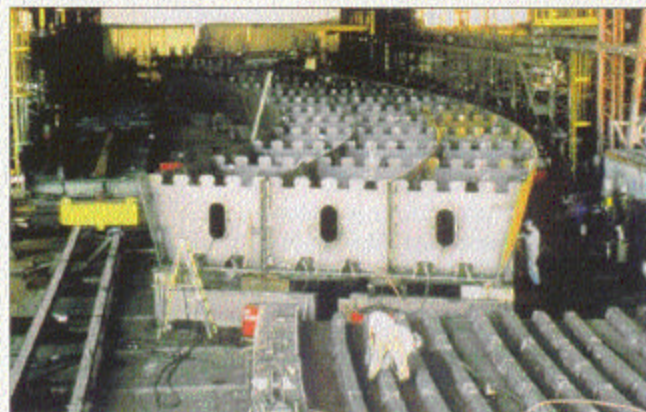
Fabrication of a steel plate (Photo courtesy of Larry Lowe)
